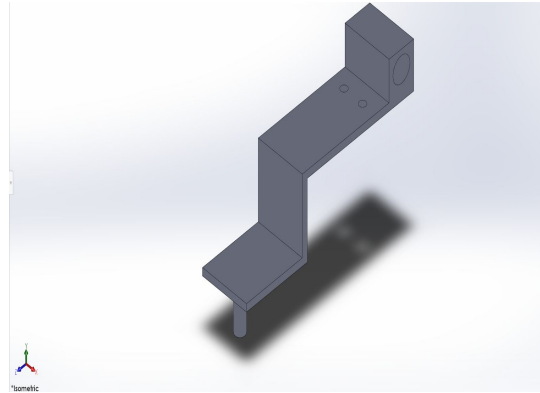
Fixed Corner Pin CAD Drawing
